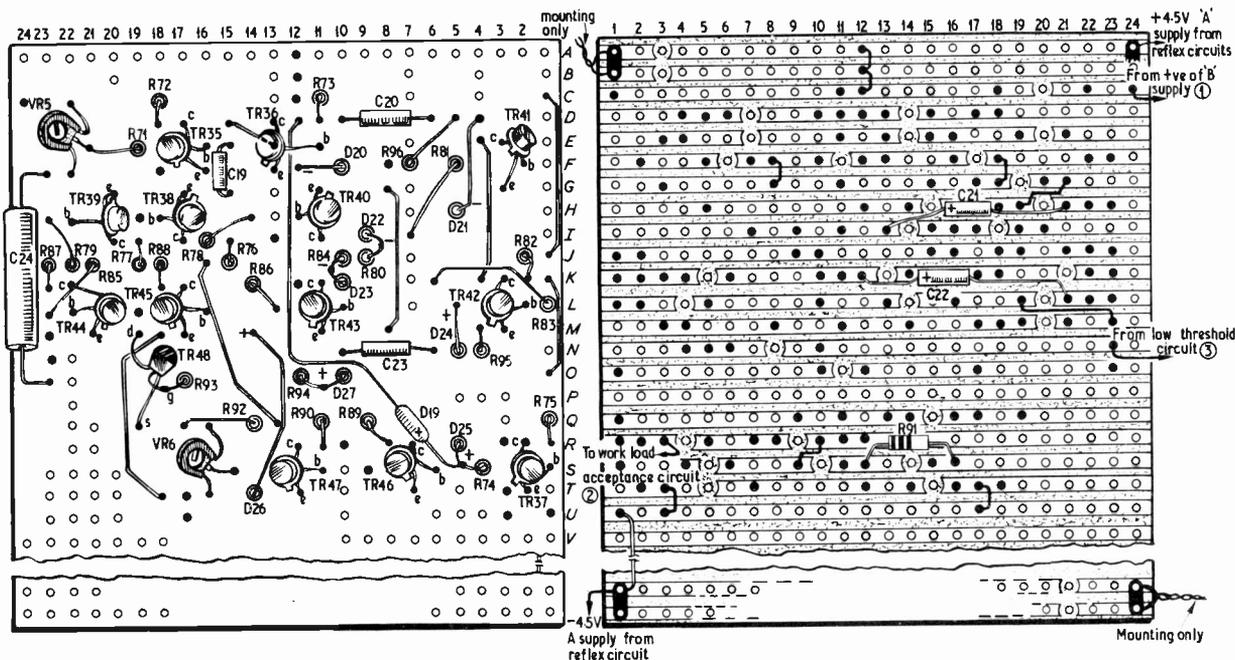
Component layout and wiring for the new board: (a) component side, (b) copper side showing breaks in the copper strips
